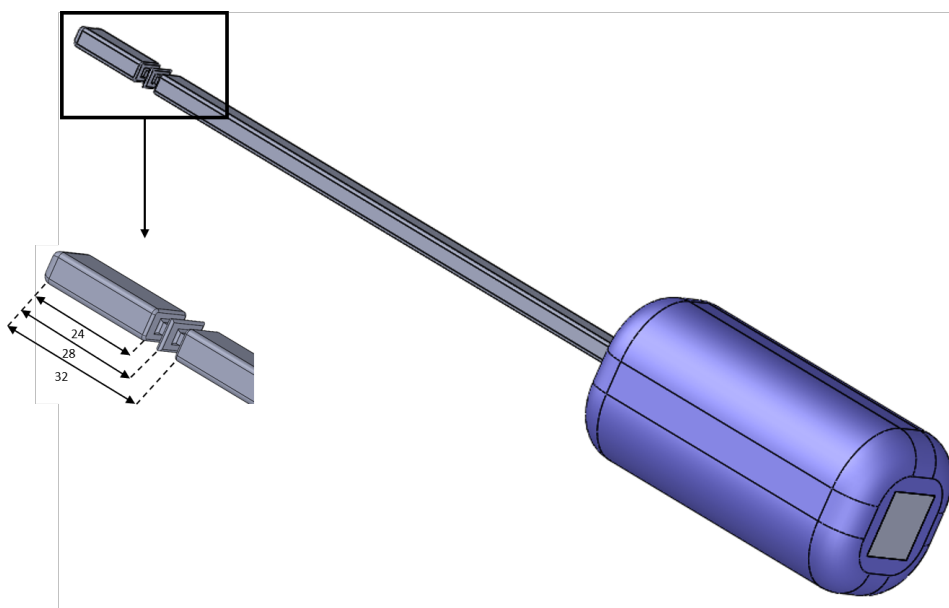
Straight measurement tool of 8mm height. Zoom on the extremity which allow to evaluate the appropriate cage length via a visual inspection through the access or using lateral imaging. Five straight measurement tools are provided for the five cage heights minus 1mm (7,8,9,10 and 11mm).
